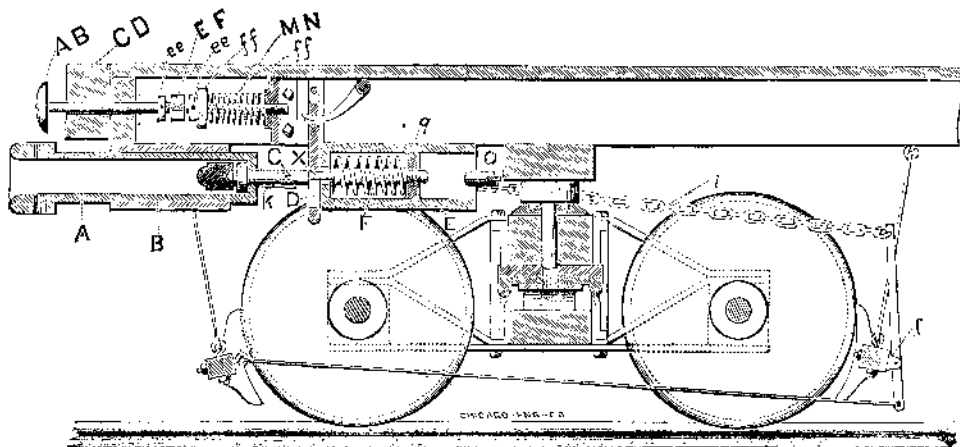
VERTICAL SECTION WITH DRAW BAR PULLED OUT.
